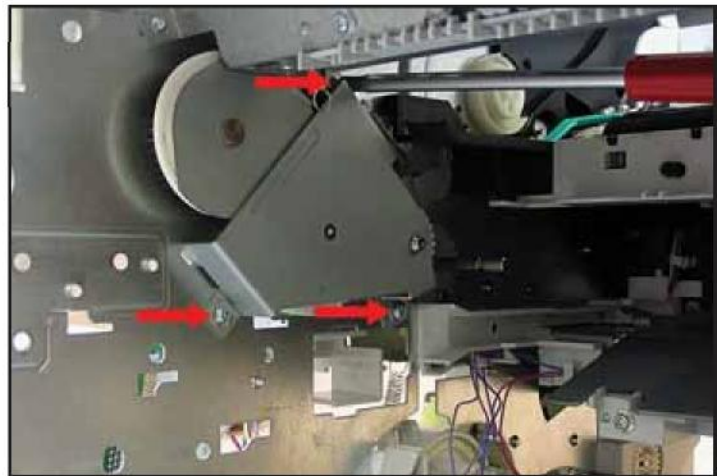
The red arrows indicate the three screws that hold on the swing plate assembly.
